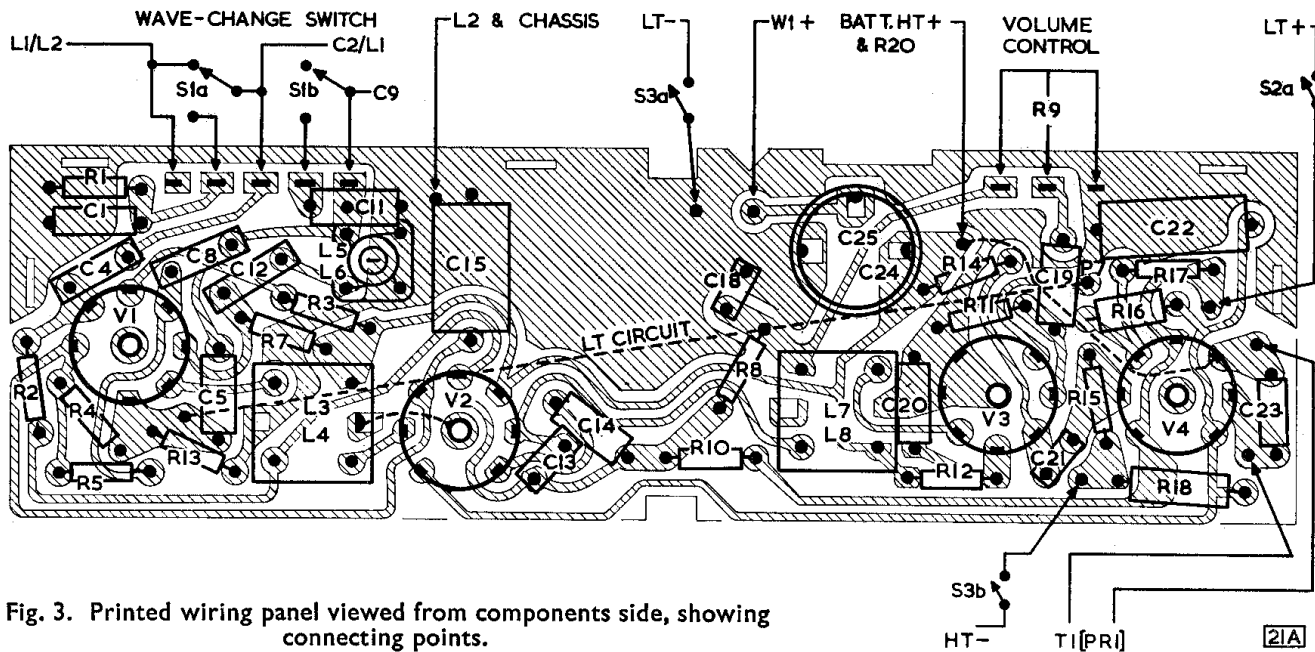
Printed wiring panel viewed from components side, showing connecting points.
